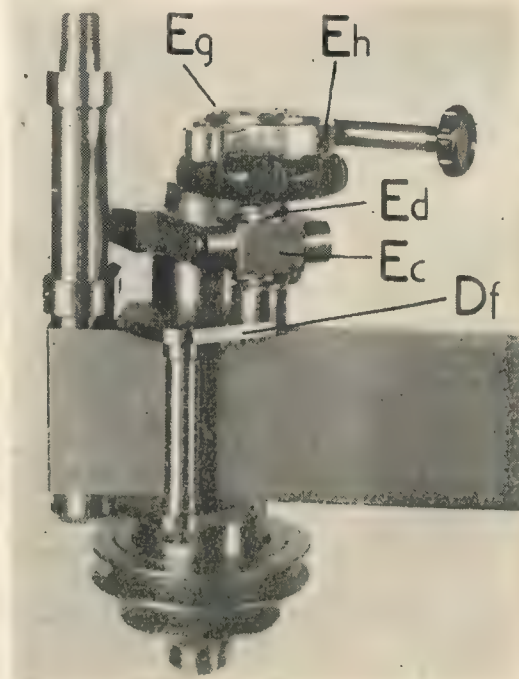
Df*—the head clamp-plate; *Ec*—the trunnion block; *Ed*—the raising-screw; *Eg*—the cover plate; *Eh*—the screw clamp-bracket
